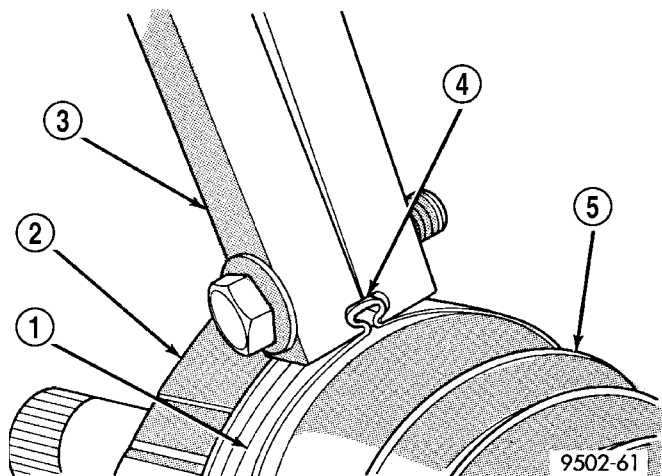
Sealing Boot Retaining Clamp Installed - Typical
